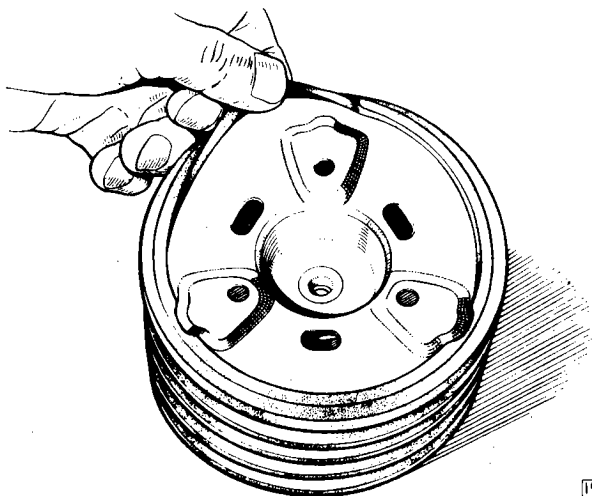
Lining up the bosses on the retainer sleeve with the recesses on the bellows
